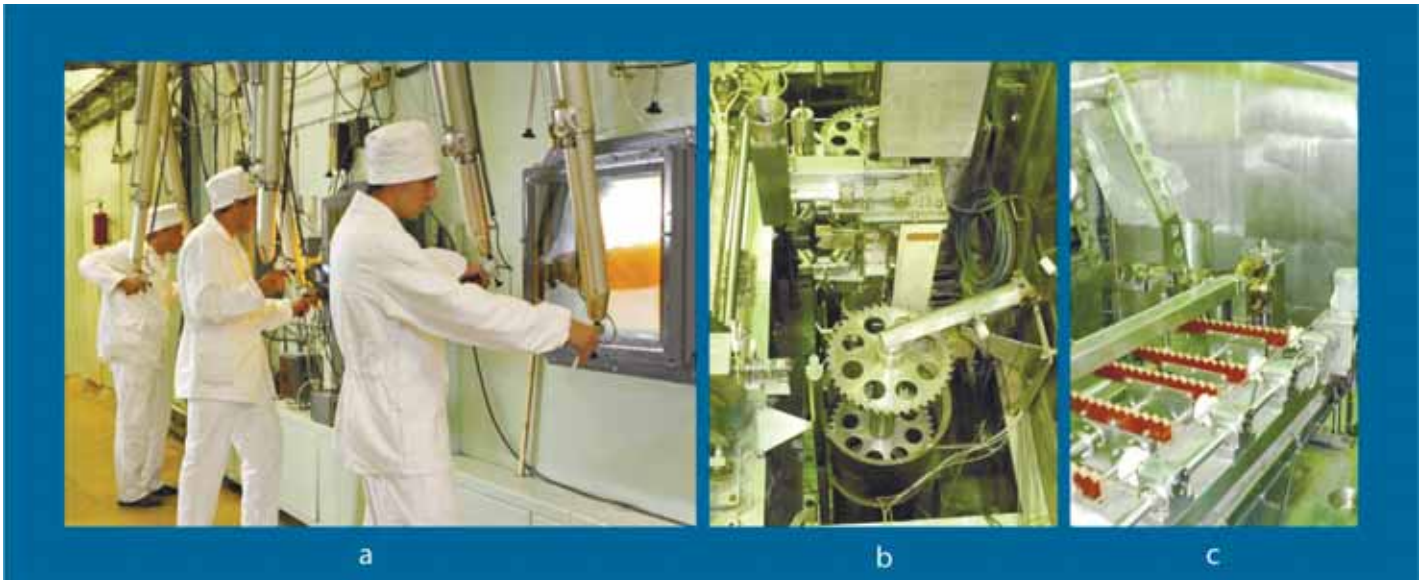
(a) Hot cell operator's room, (b) FA assembling equipment, and (c) fuel decontamination equipment
